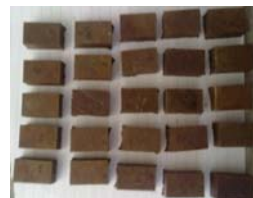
Specimen after Machining (En 8): Size - Dia.170mm and Thickness 10mm
